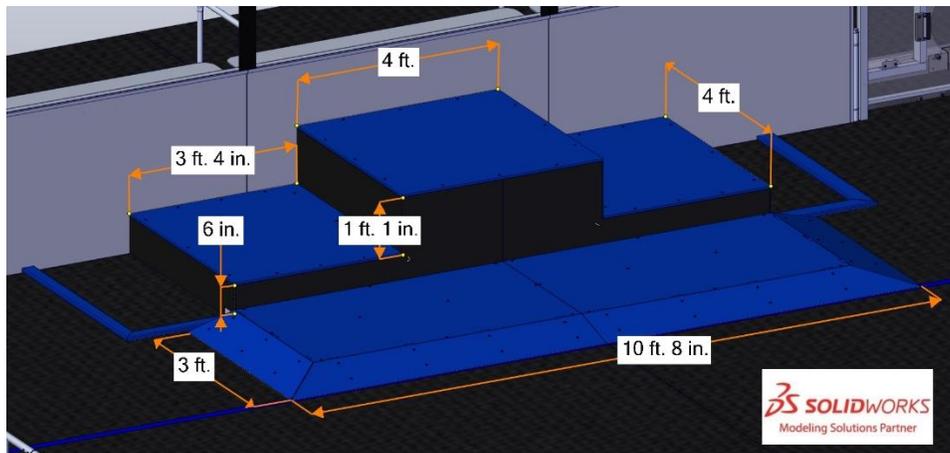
Blue HAB PLATFORM with major dimensions.
